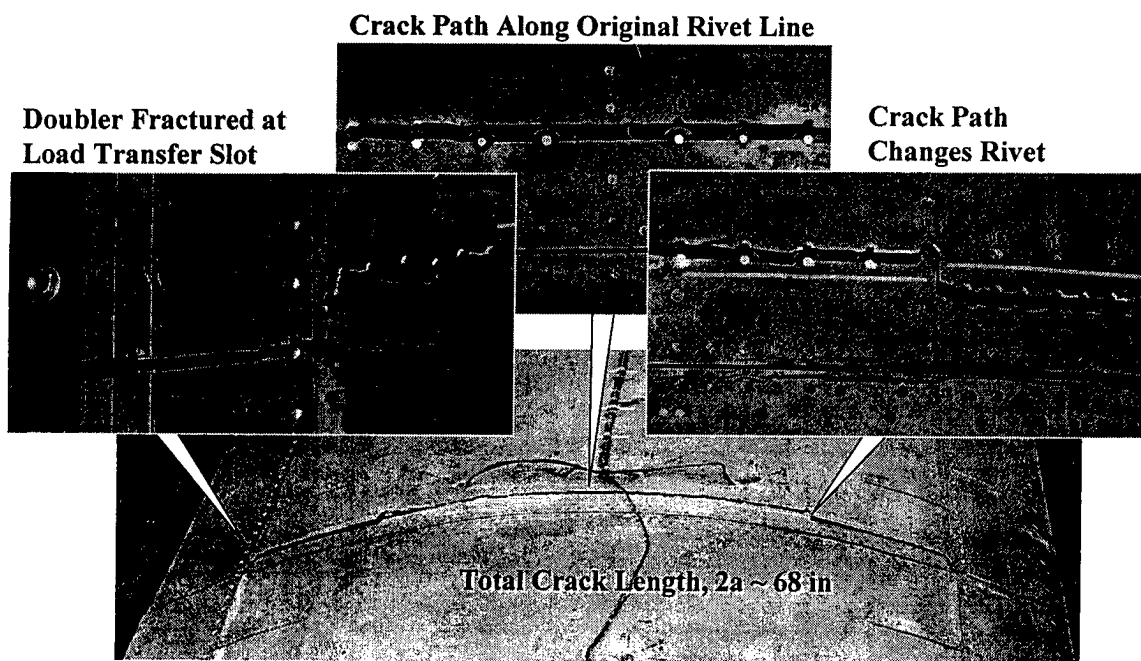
PHOTOGRAPHS OF THE FINAL STATE OF DAMAGE IN PANEL CVP3 SHOWING SKIN FAILURE
